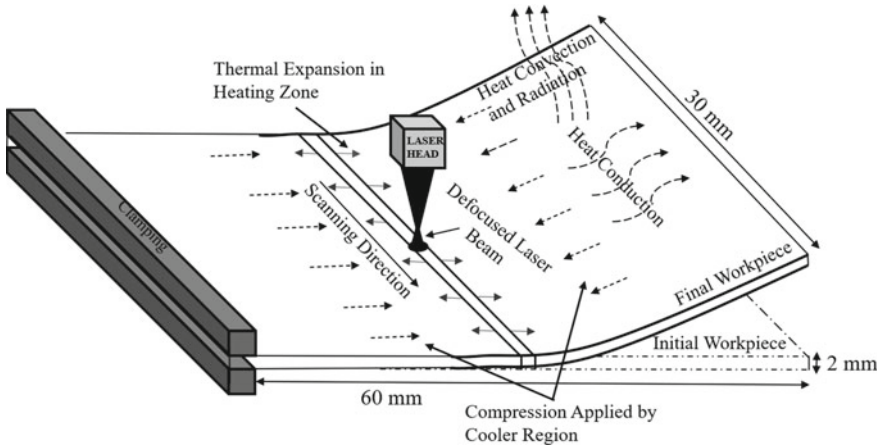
Dimensions and schematic of the laser bending of duplex stainless steel
